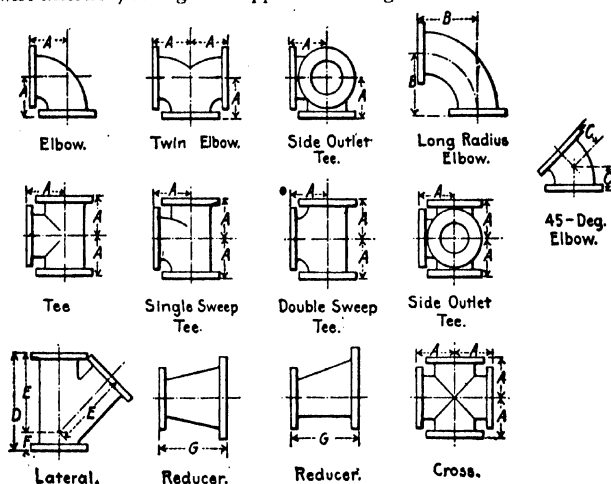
Standard flanged fittings for W. I. and steel pipe.
